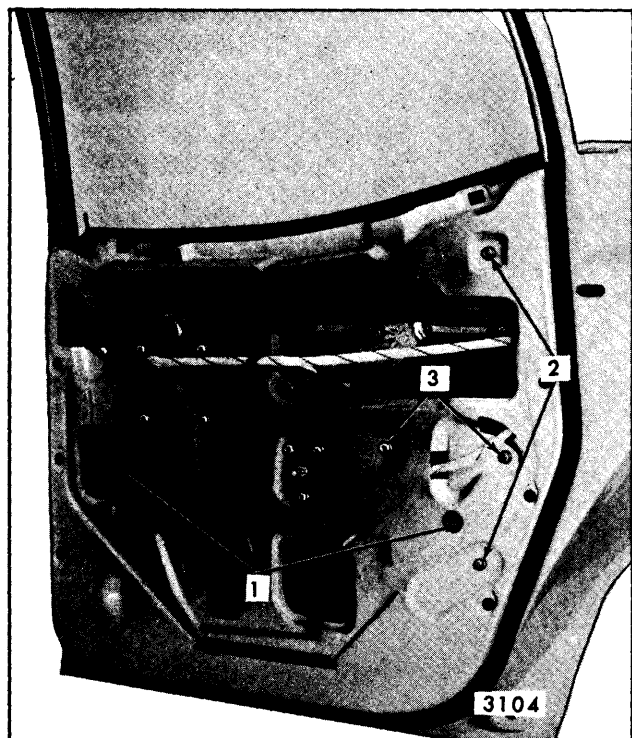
Rear Door Window Removal and Adjustments - "A" Closed Styles
